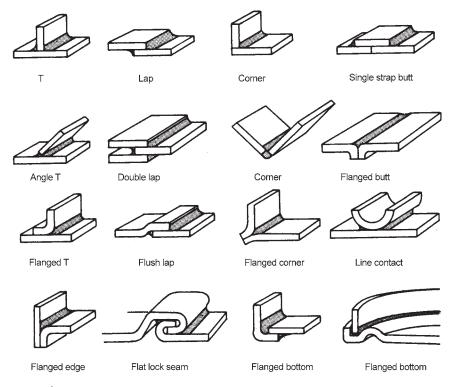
Joint designs frequently used in soldering. Source: Ref 7.10
